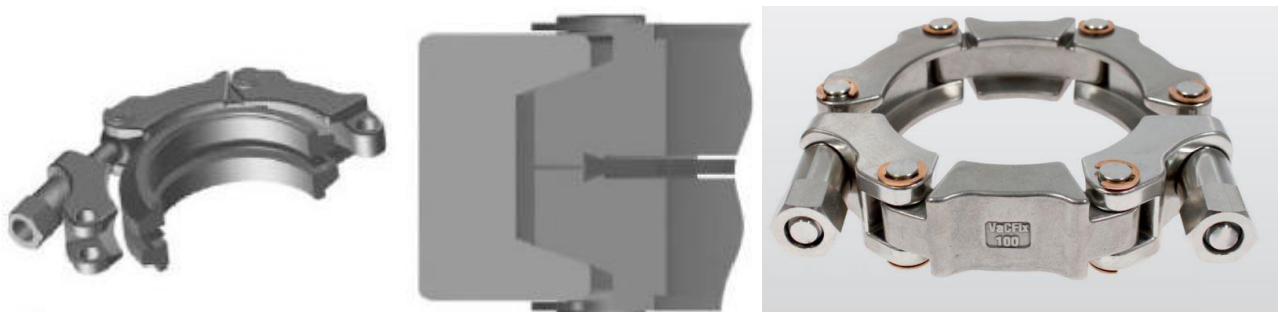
Schematic drawings of the QCF® flange system proposed by Vacom® (left) and photograph of a VacFix® chain clamp (right).
